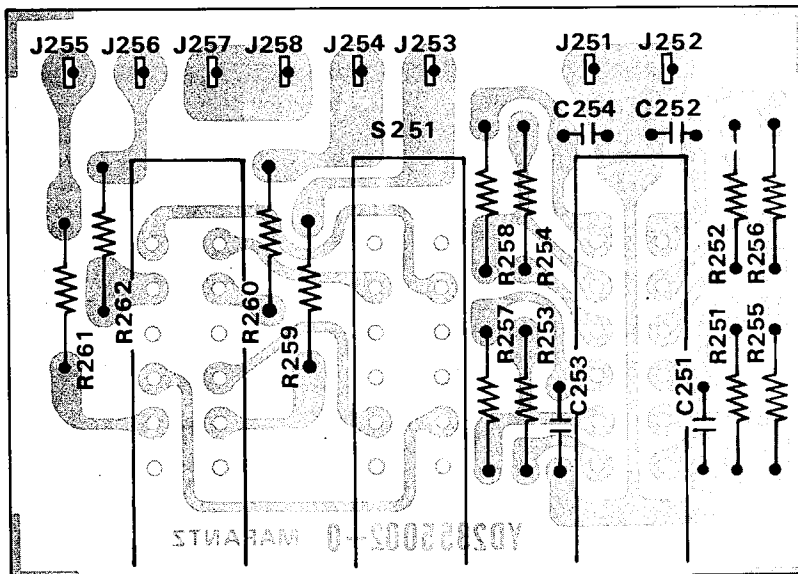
Tape Mon., Hi Filter Unit Assembly P250 Component Locations
